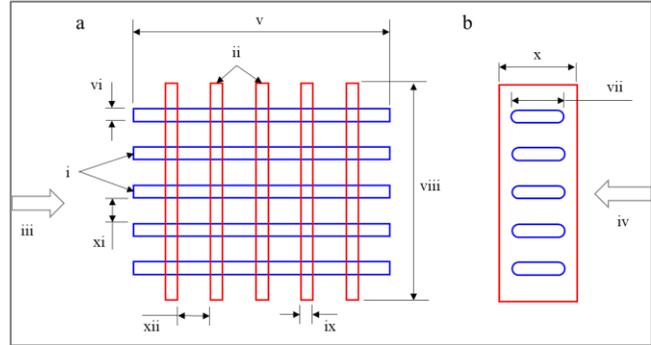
Simplified representation of single row tube & plate heat exchanger (a) Front view, and (b) Side view.
